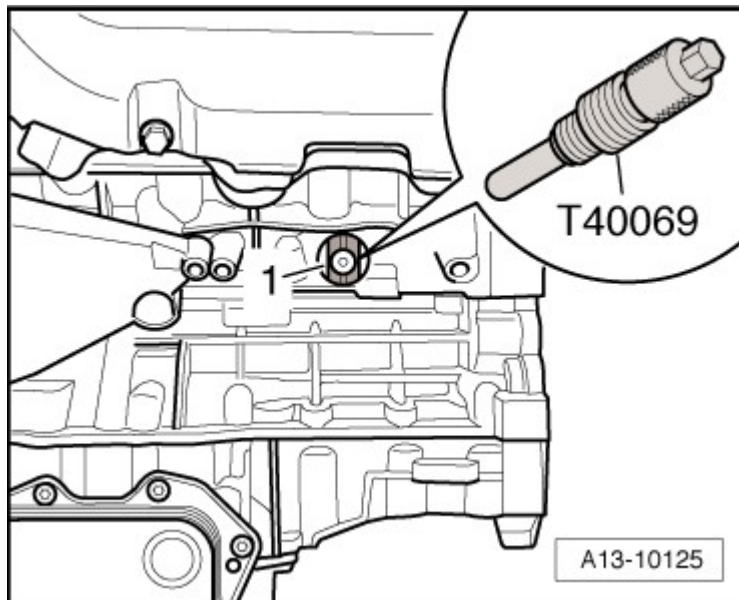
Identifying Crankshaft Holder T40069 In Hole, Removal/Installation
